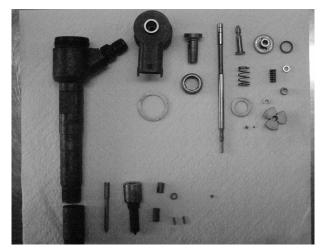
Electromagnetic Bosch generation 1.0 injector disassembled into spare parts
